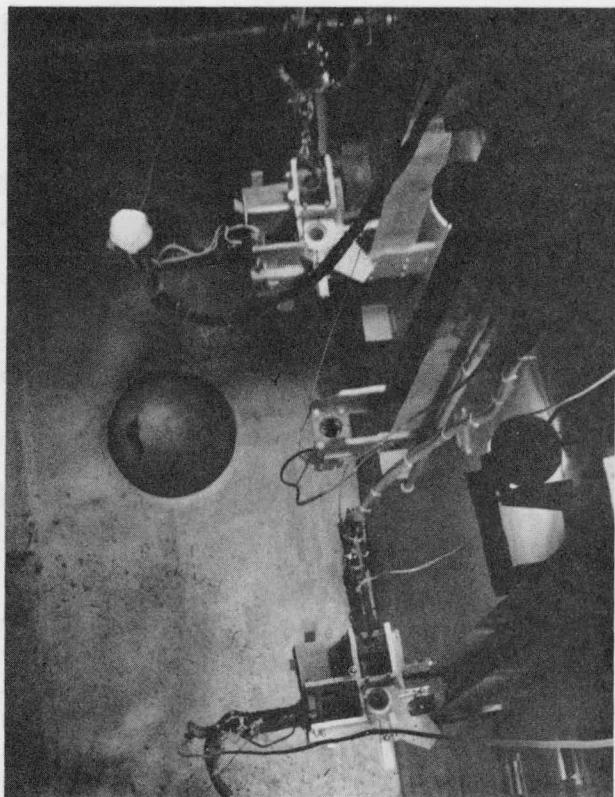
Aluminum Blade Guide Bracket Broke During Lift When Blade Guide Interfered with Storage Racks (See Figure 125)
